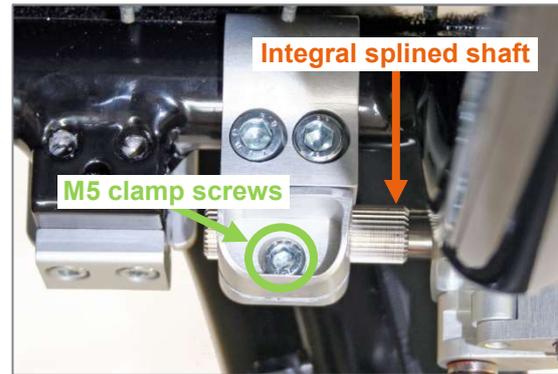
M5 clamp screw for moving the integral brake with integral splined shaft in the clamping bracket (view from the inner side of the product)
